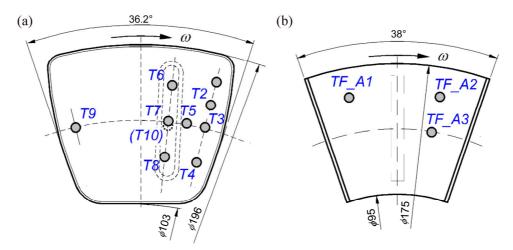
Arrangement of the temperature sensors in the test bearings. (a) Bearings nos. 1 and 2; and (b) bearings nos. 3 and 4.
